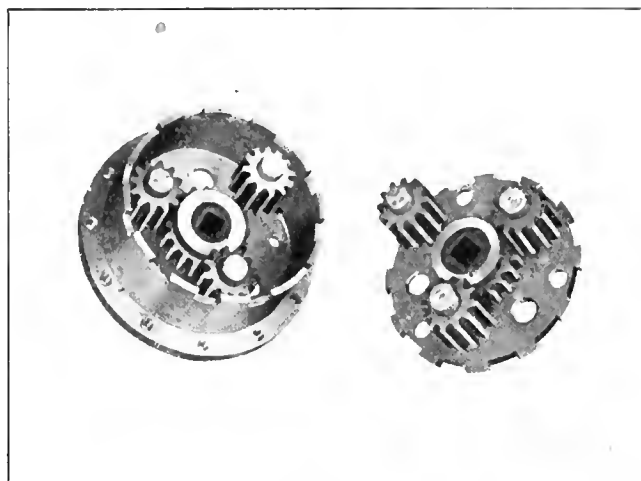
A Small Size of Equalizing Gear Dismantled to show Construction
